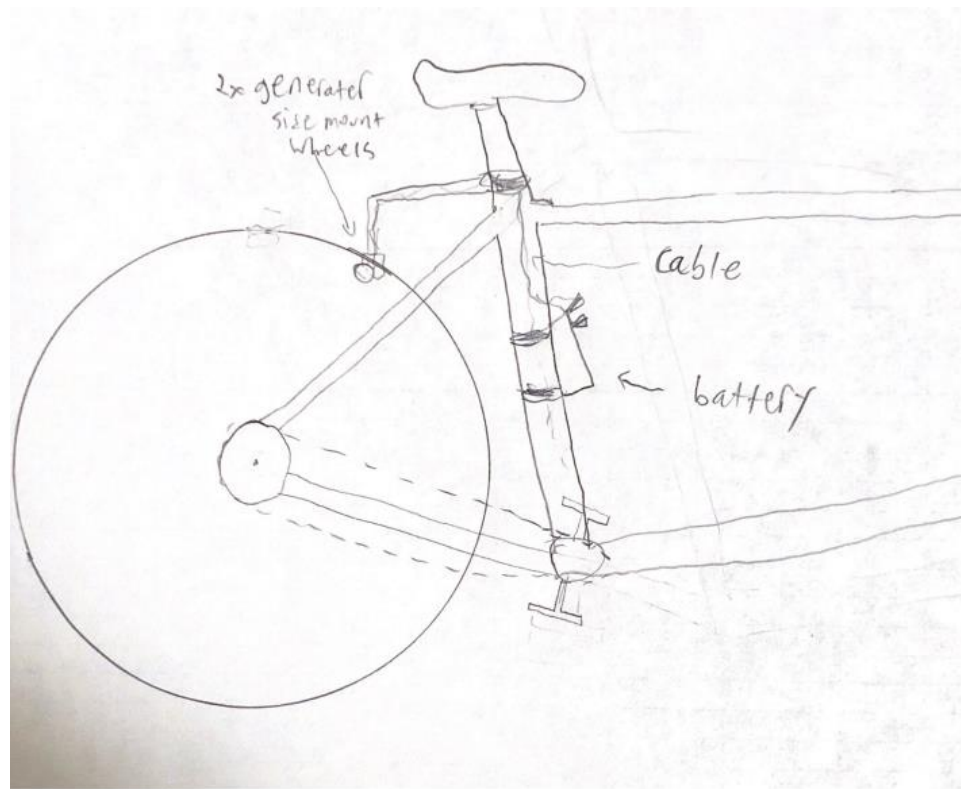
Simple Model of V5 Perpendicular Dual Wheel Mount
